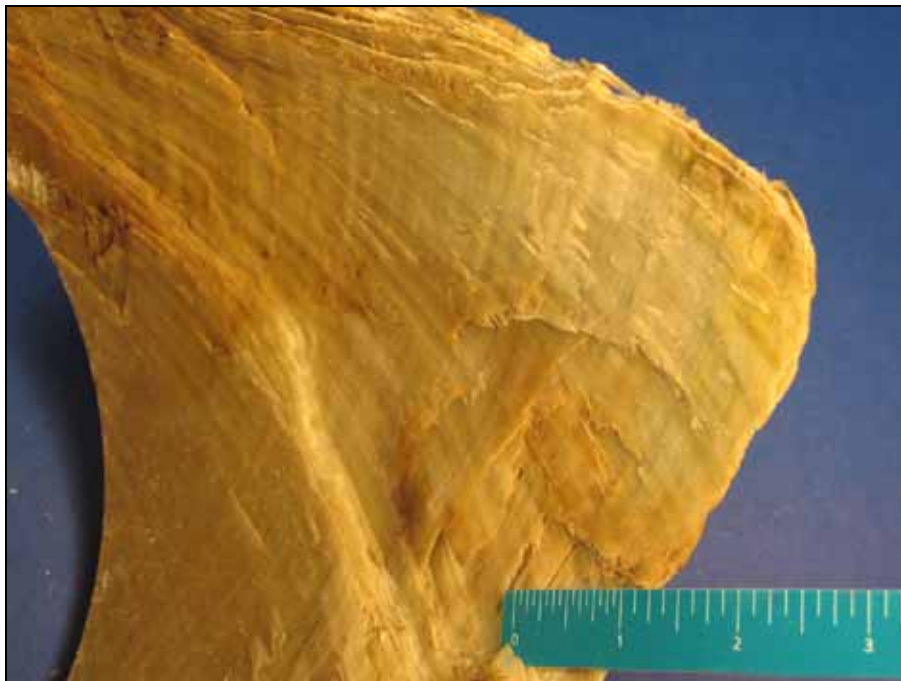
Failed 6' Pup: Wear On Internal Surface Close To Fracture Surface
